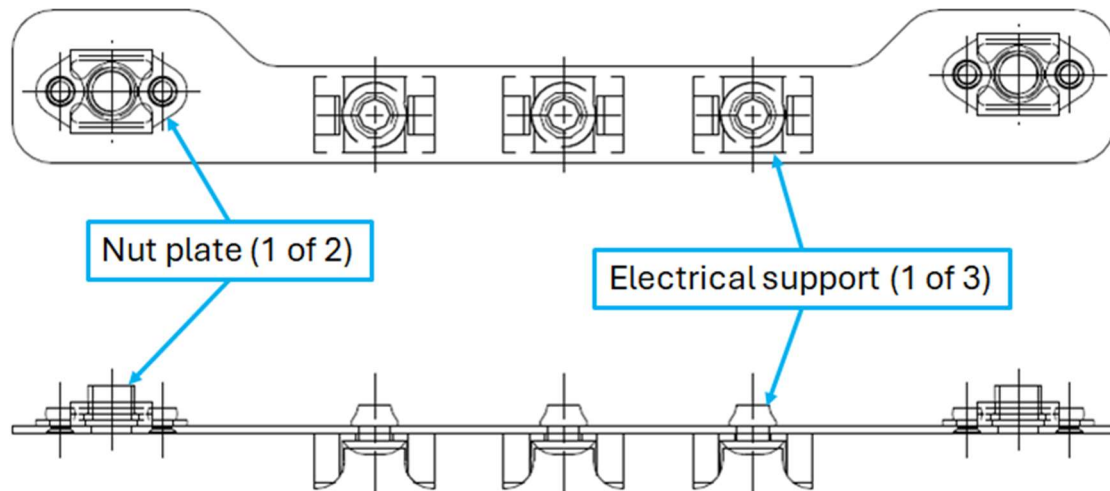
The two views of the right strip assembly in its manufacturing job card. (Courtesy of Leonardo, modified by NTSB)
